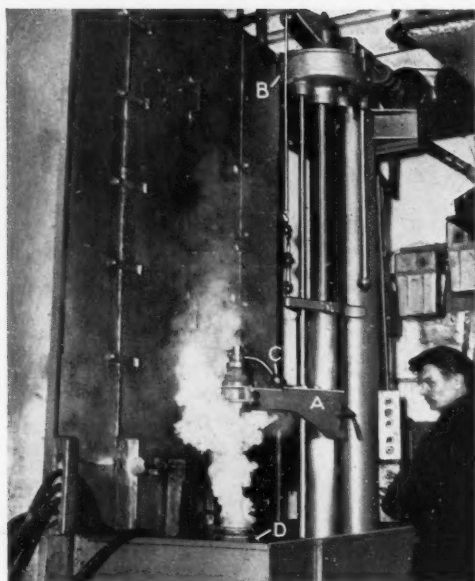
Spindles and Shafts are Induction Hardened by Means of this Rig, which is Installed in the Main Heat-treatment Department. The Workpiece is Supported Vertically, and is Lowered Through an Inductor Coil into a Quench Tank
